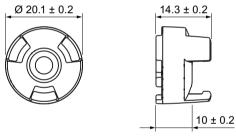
Dimension drawing of spacer 6GT2690-0AG00
